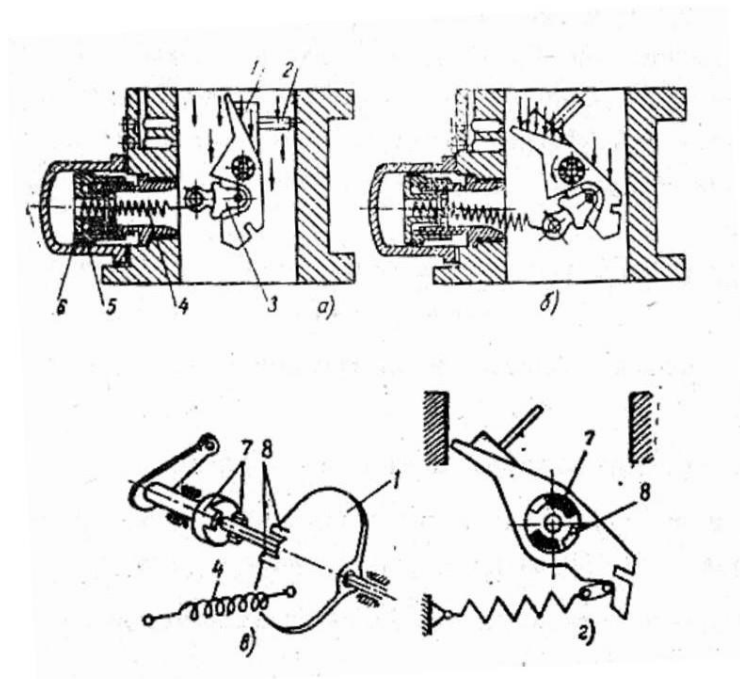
Pneumatic limiter of the maximum number of revolutions and its operation scheme. a-throttle valve fully open, b and g-throttle valve closed; c- scheme of transmission of motion to the throttle valve; 1- throttle valve; 2-pin; 3-hook; 4-spring; 5-locking nut; 6-sleeve; 7-knob; 8-outlet.
